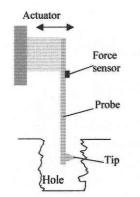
Measurement of inner dimensions of deep holes with long probes
